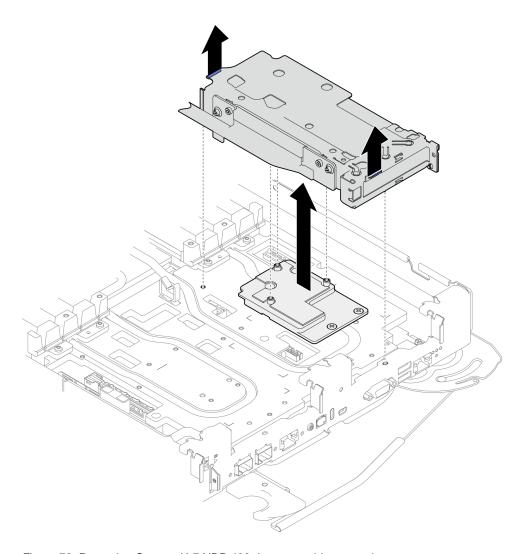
Removing ConnectX-7 NDR 400 riser assembly removal
